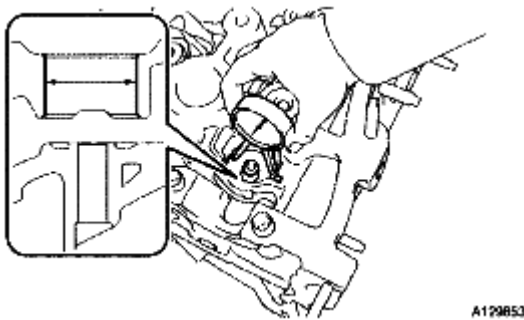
Identifying Lifter Bore Diameter Of Cylinder Head
